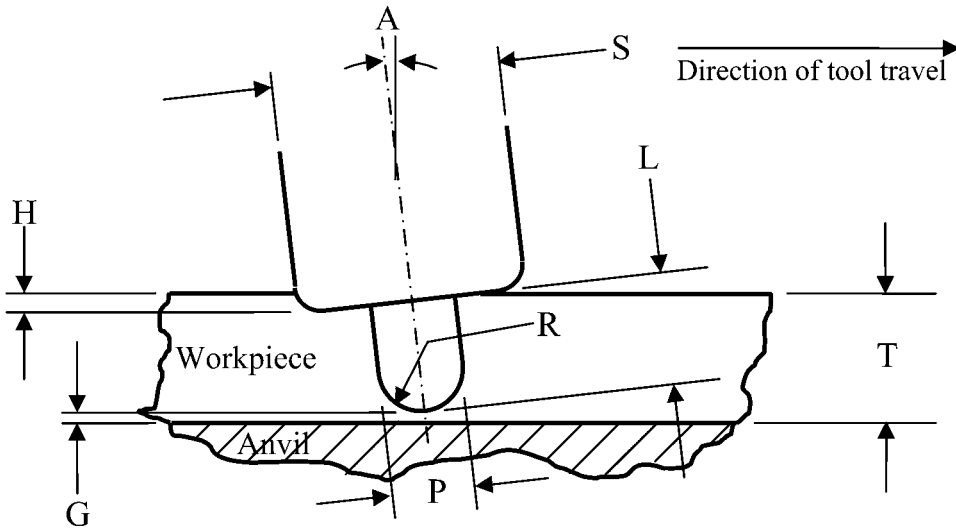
Schematic of friction stir welding tool, anvil, and workpiece for spherical-tipped pin and tilted tool axis, side view. See text for an explanation of the variables.
